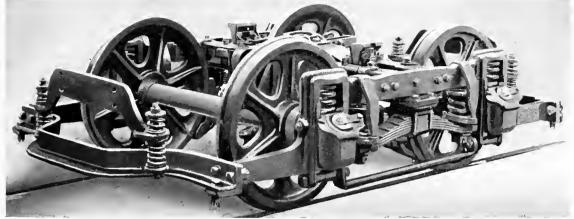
No. 27-GE1 Truck. Solid Forged Side Frames.
